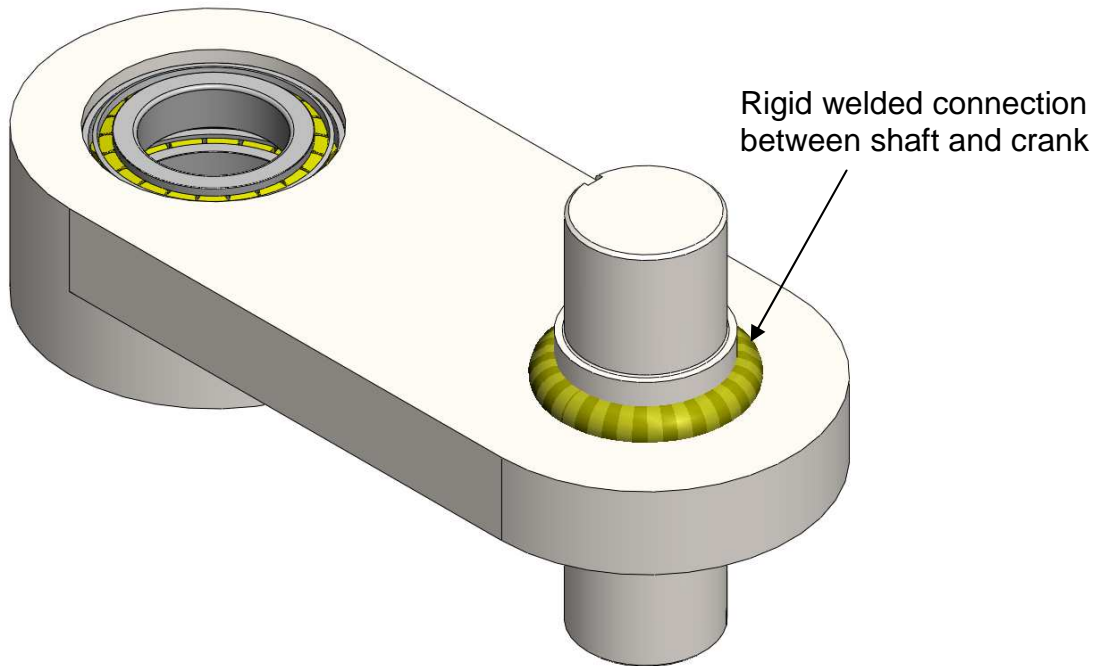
Isometric view of crank 2 showing the suggested welded shaft arrangement to overcome the high bending moments at this bearing location
